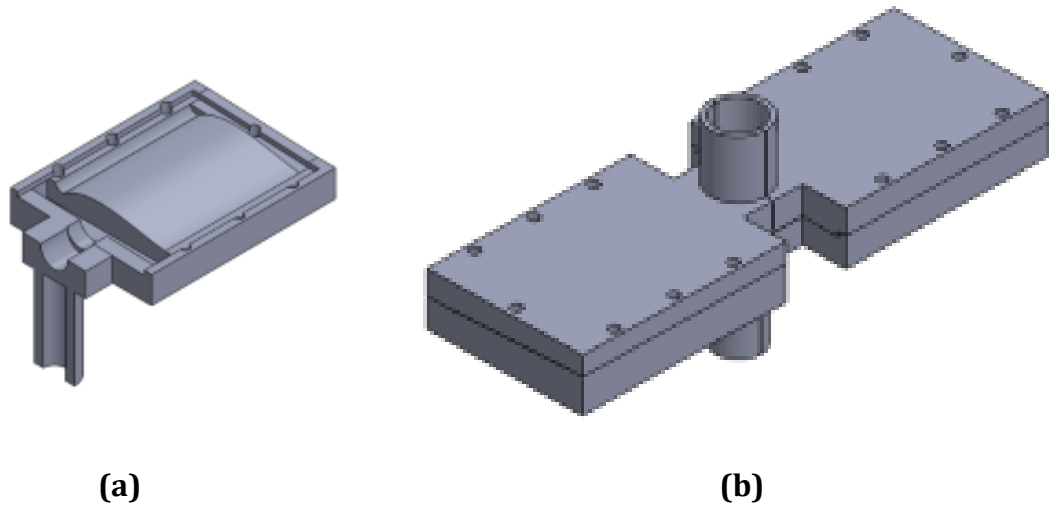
Solid works model of the centrifugal cast mould for turbine exit vane guide (a) lower half of the mould and (b) whole assembly of the lower and upper half of the centrifugal mould
